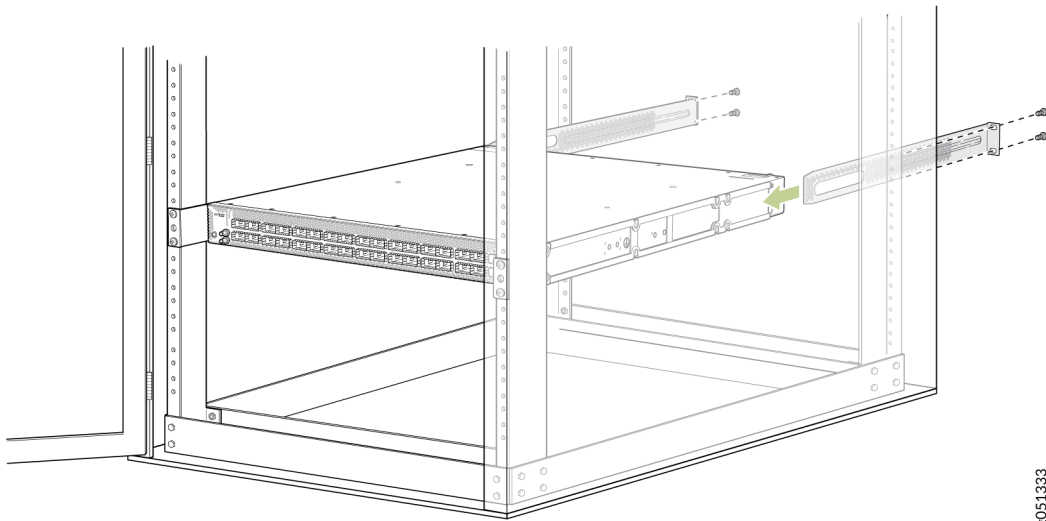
Attaching QFX5130-32CD to Cabinet Rack
